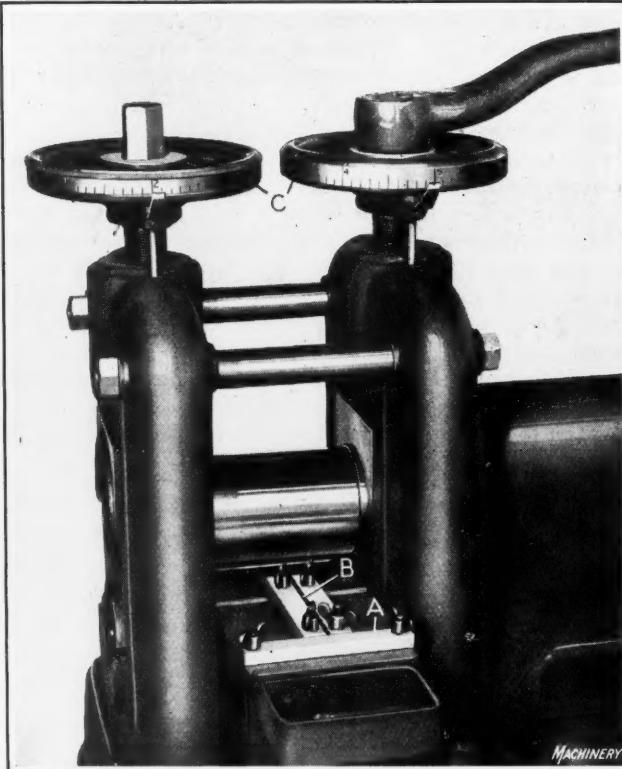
Type of Machine employed for rolling Circular Wire into Flat Ribbon Stock
